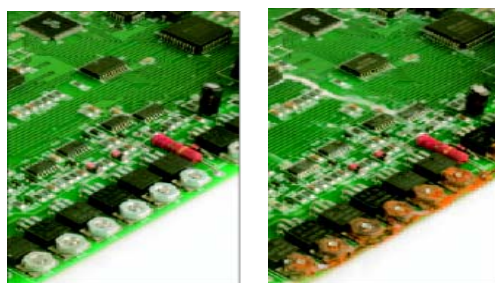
Close up view of Parylene HT coated (left side) and corroded uncoated PCB board (right side) after salt fog test.
